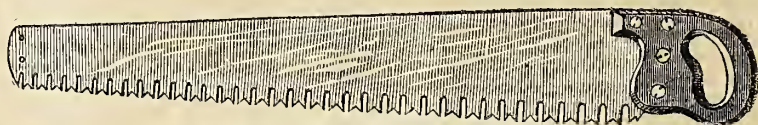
SINGLE-HANDED CROSS-CUT SAW.
